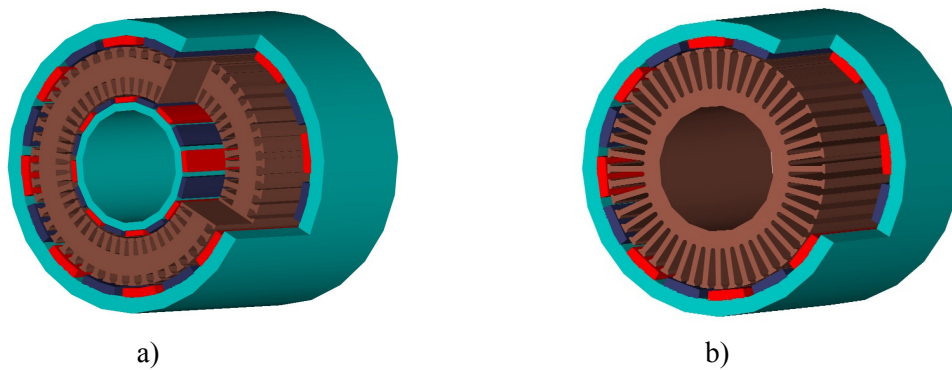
3D configurations of PM machines; a) single outer rotor surface-mounted PM machine; d) double rotor surface-mounted PM machine [Par 2005].
